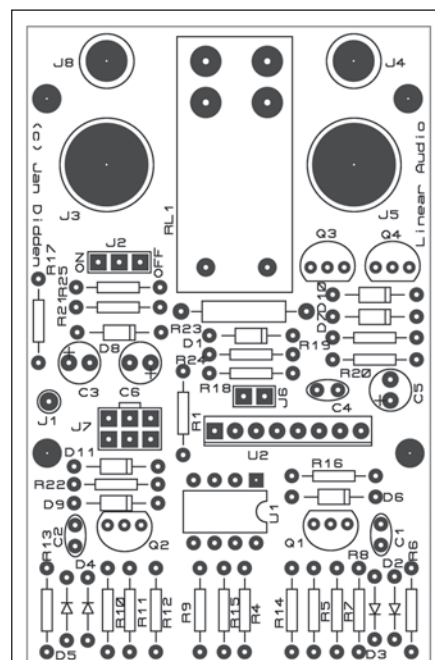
Component placement of the double-sided PCB for the o/p board.
